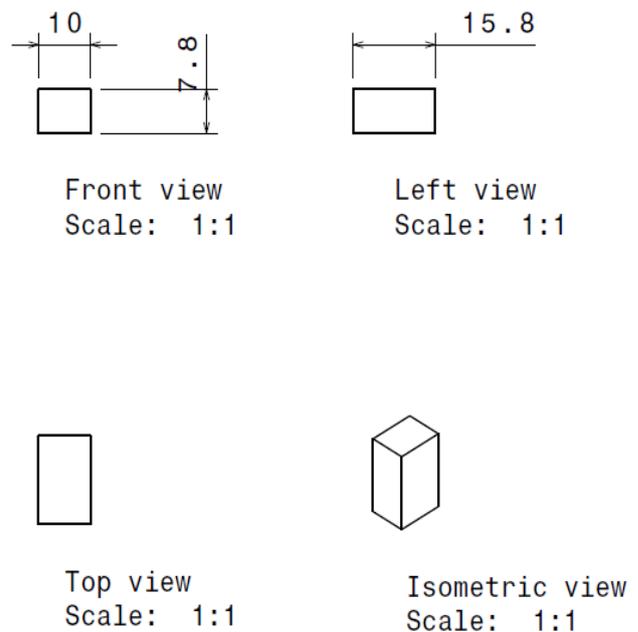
Technical drawing of specimen for specimen with dimension 15.8 × 7.8 mm.
